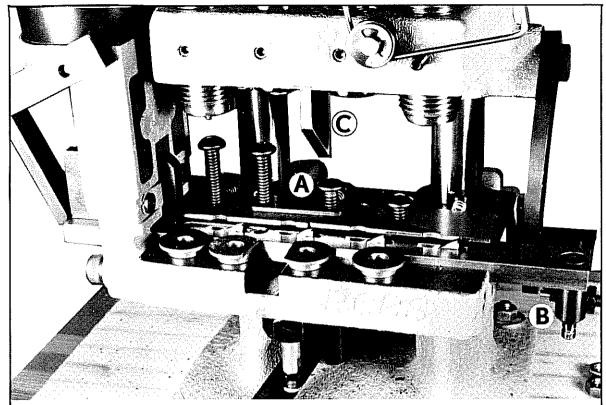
Front Transfer Rail removed. Note second and third Transfer Rail Spacers are modified to provide clearance for Primer Feed Locking Block. When reassembling, these two spacers must be replaced as shown. Behind them, note four button head cap screws that secure the rear Transfer Rails; here, partially withdrawn. Note the position of the rear Rail Brace (A), Case Transfer Bar Return Block Assembly (B), and Primer Transfer Cam (C).
